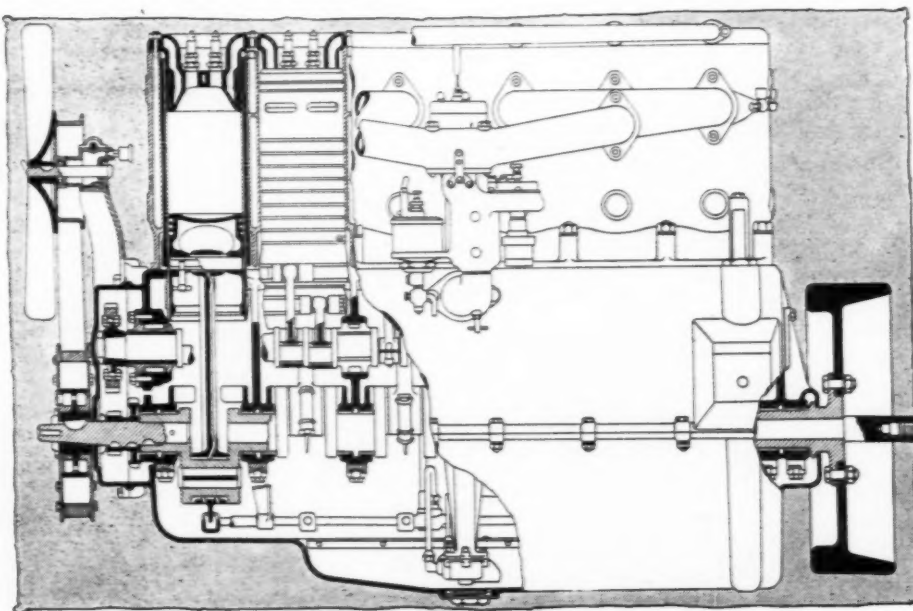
Partial section of the six-cylinder Stoddard-Knight motor
